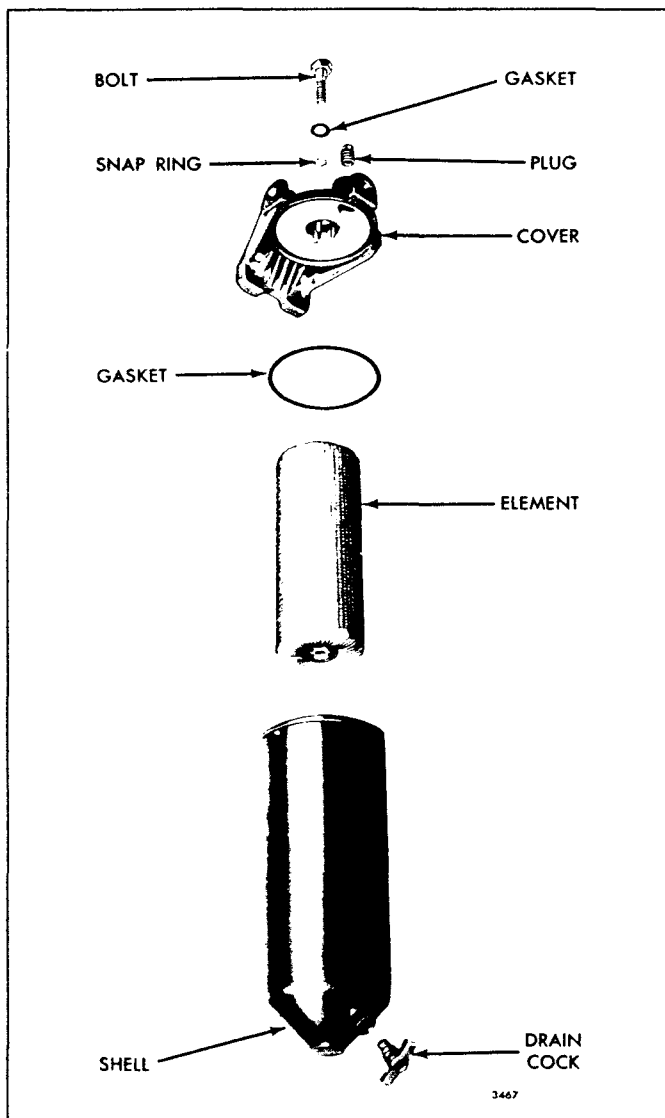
Fuel Strainer Details and Relative Location of Parts
